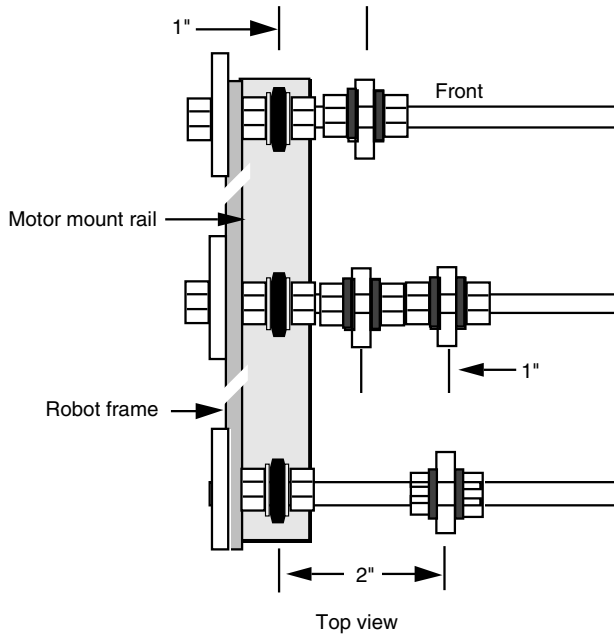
The leg shafts attached to the motor mount rails (left side shown only).
